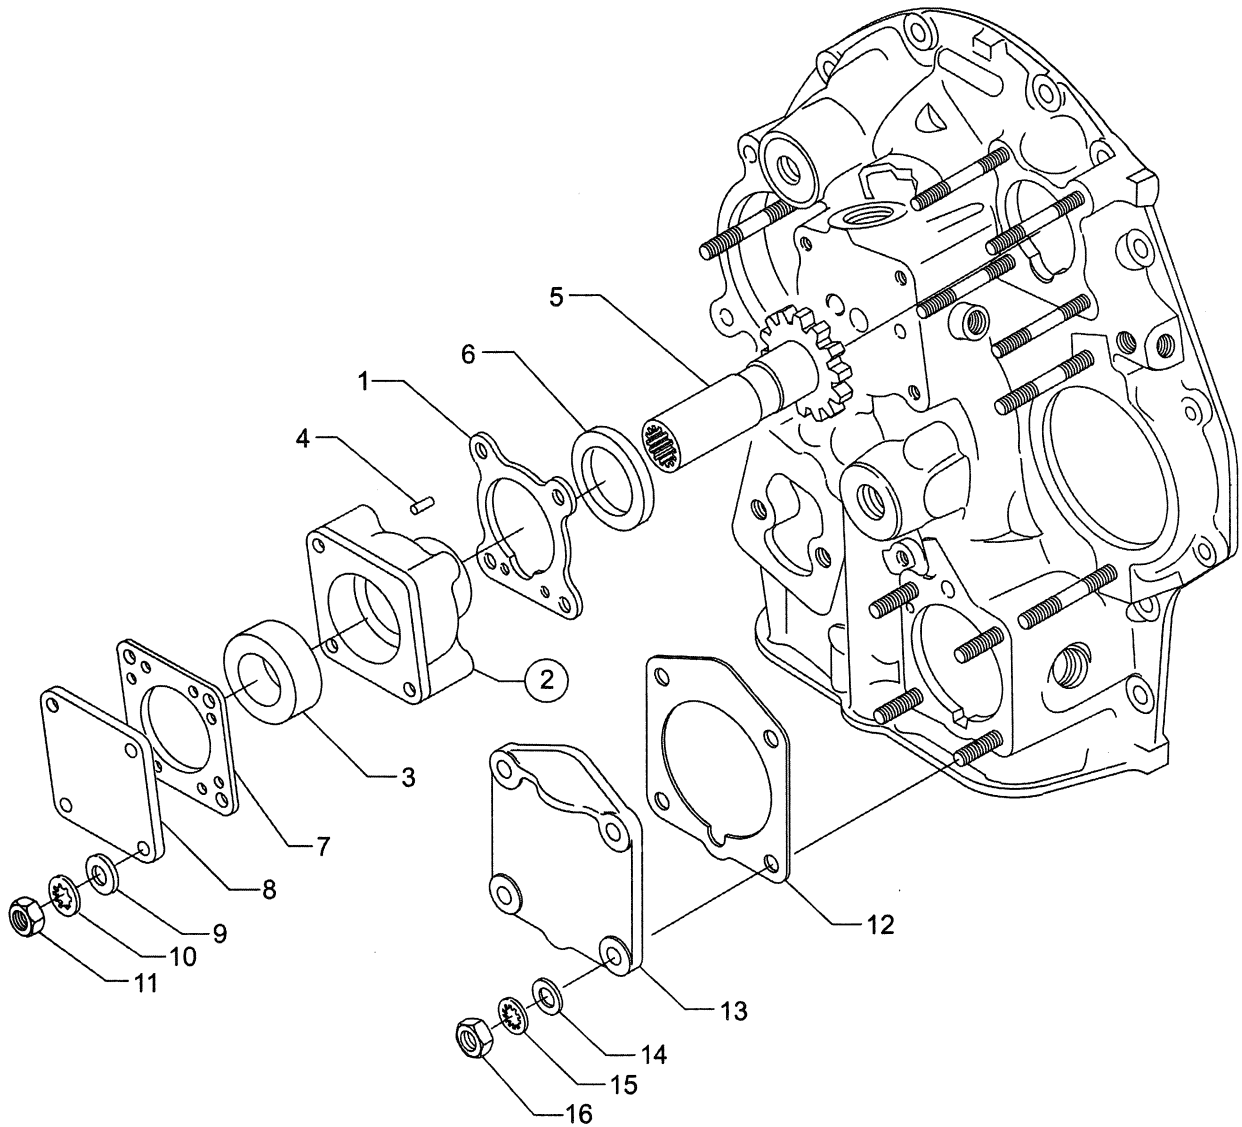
VACUUM PUMP DRIVES AND HYDRAULIC PUMP COVERS
